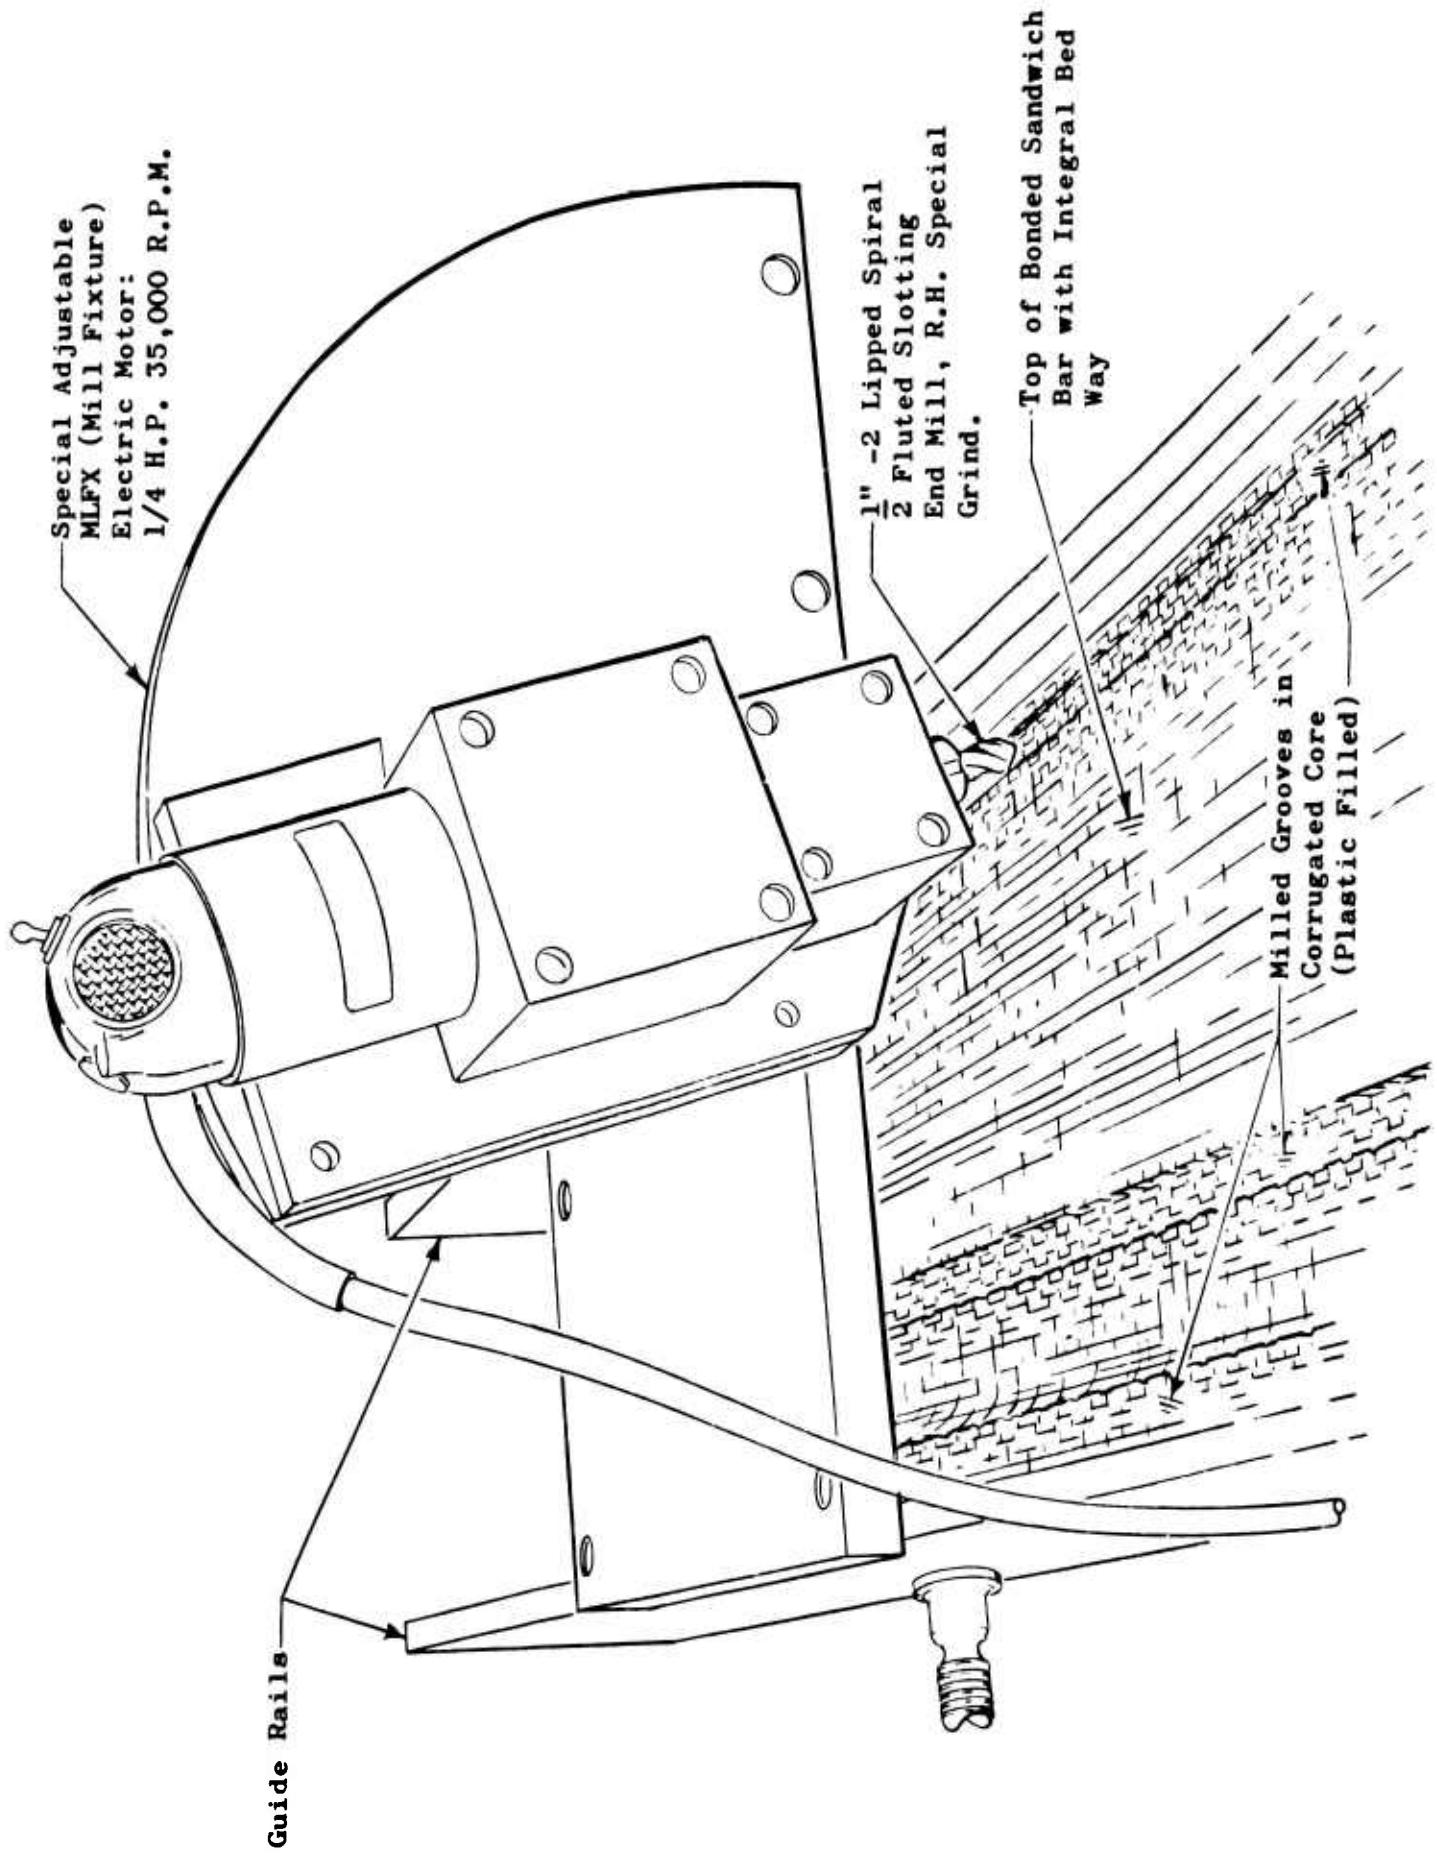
Milling Fixture in Operation on Guide Rails Secured to Bar
